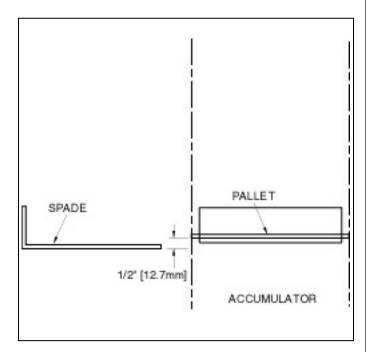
SWITCH LS-22 ADJUSTMENT.
